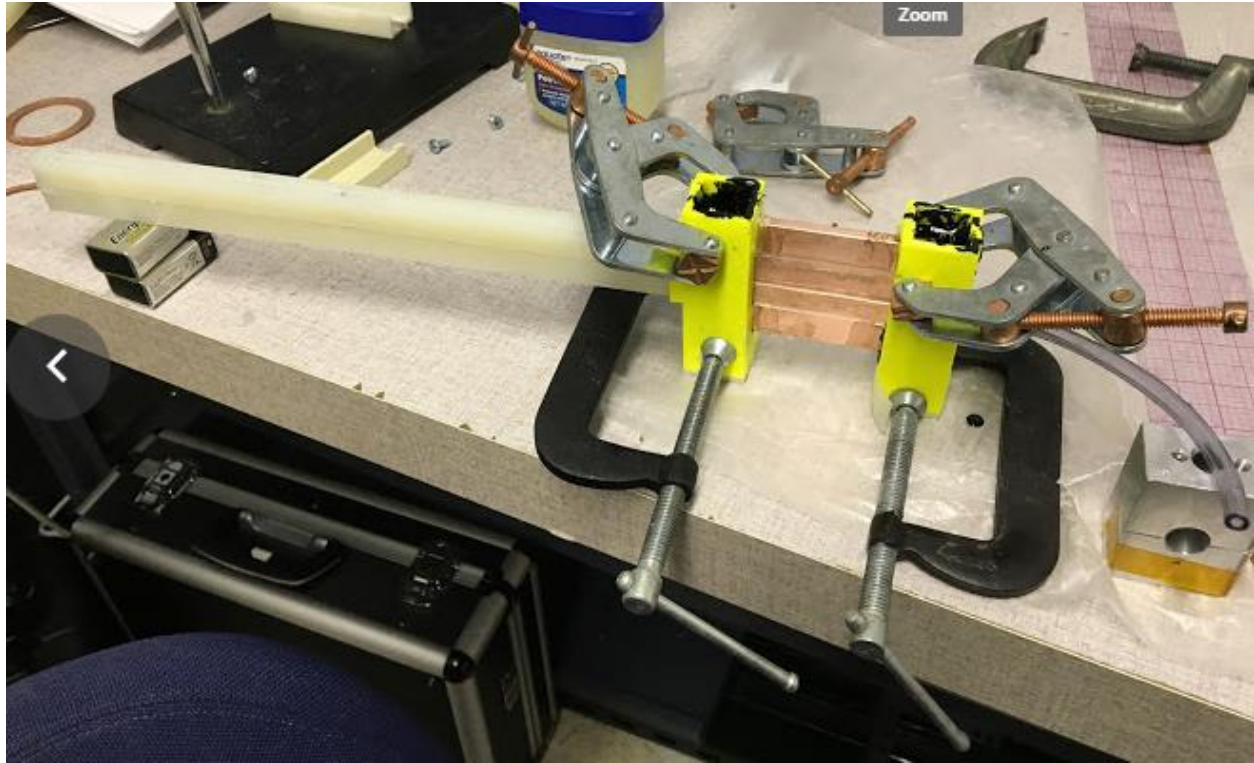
Construction of the test channel. Forms are shown clamped together while potting compound sets.
